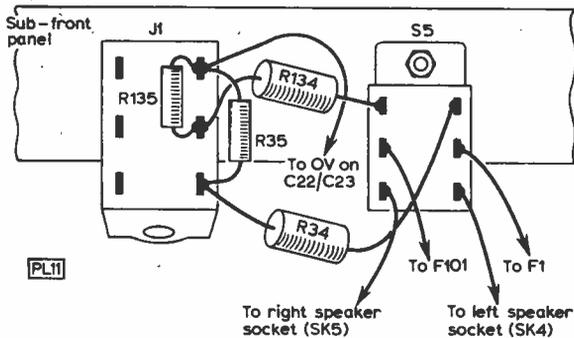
Wiring details of the headphone jack socket J1 and headphone loudspeaker switch S5. Further wiring details will be given next month.
